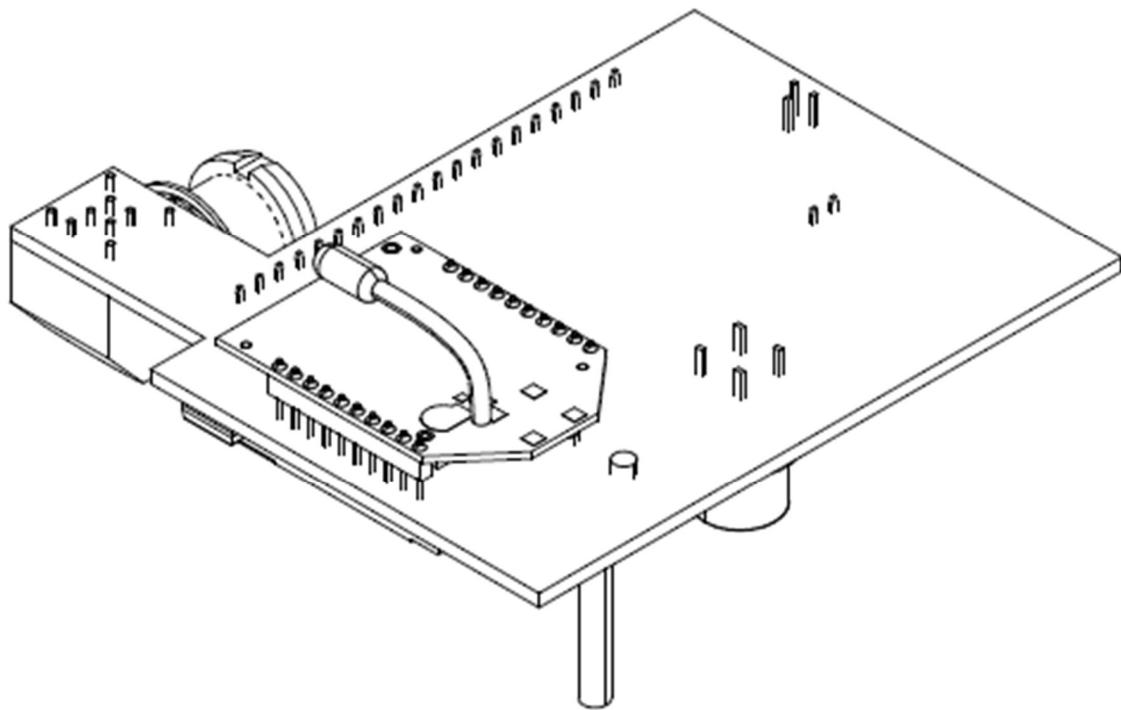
MACK Sony Camera Control System Sender PCB Bottom Isometric View
